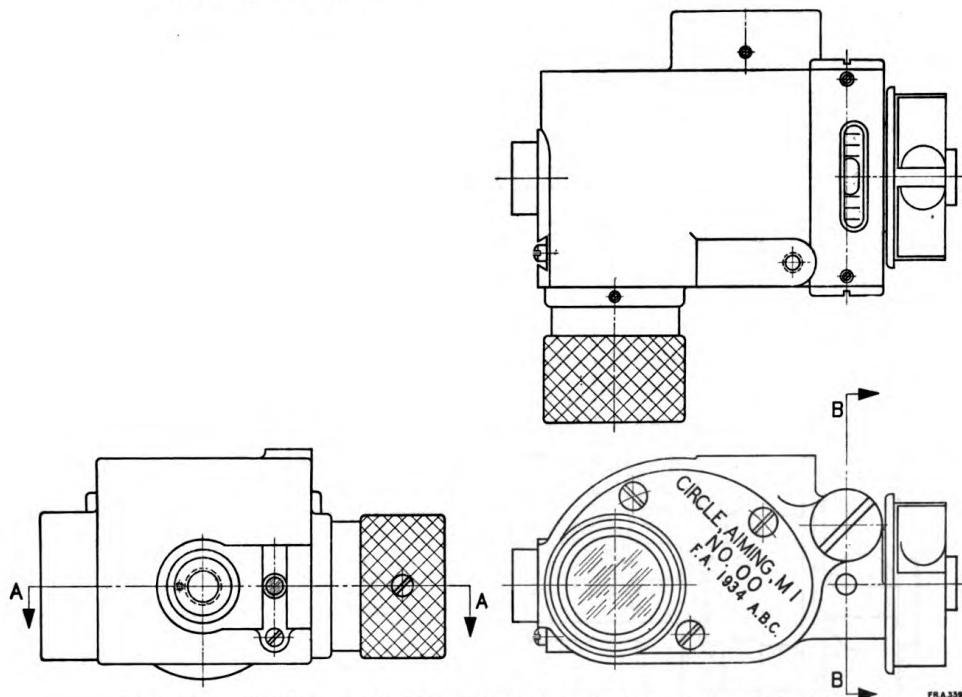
Aiming circle, M1—telescope assembly—assembled views.
